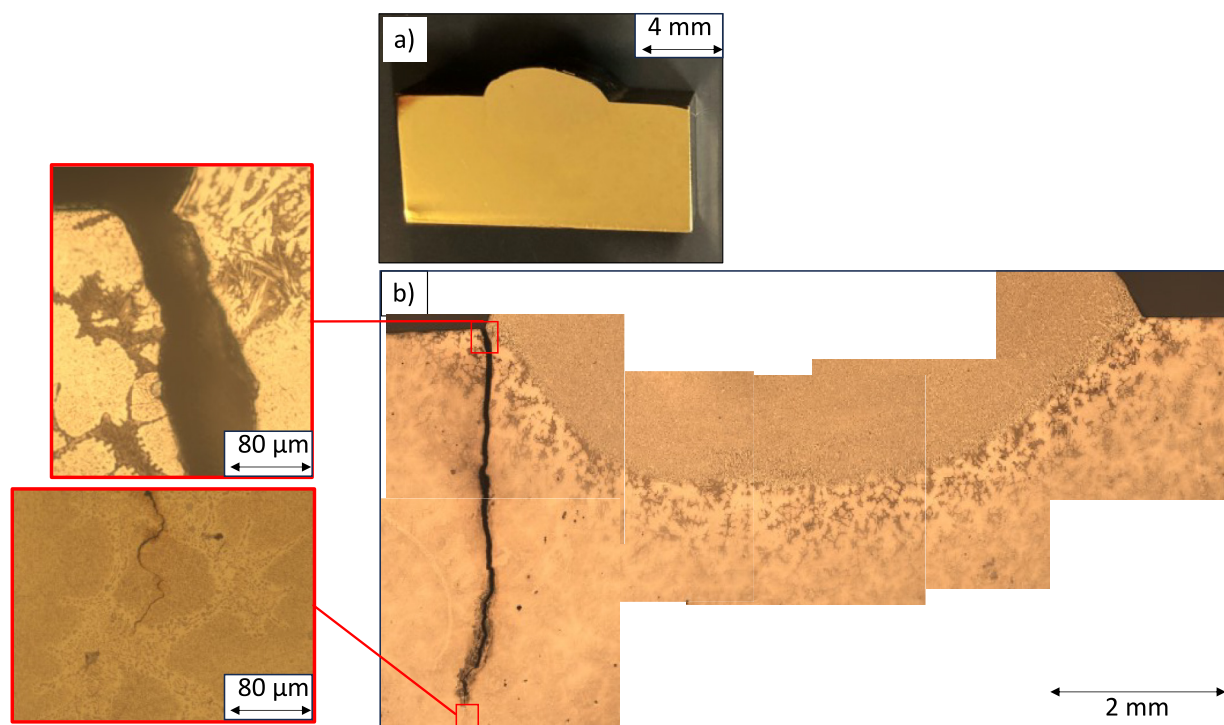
| (a) Sample showing crack at the weld toe caused by fatigue. (b) Etched optical image looking at the side of the weld bead where a fatigue crack has initiation at the weld toe and propagated into the parent material with magnified images of the weld toe and crack tip. [Colour figure can be viewed at [wileyonlinelibrary.com](https://onlinelibrary.wiley.com)]
